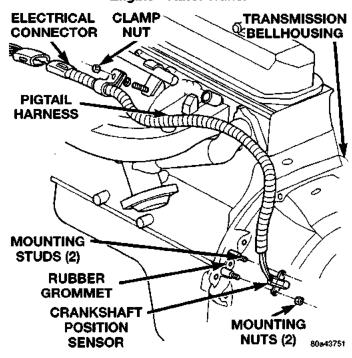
Crankshaft Position Sensor—2.5L 4-Cyl. Engine—Auto. Trans.
